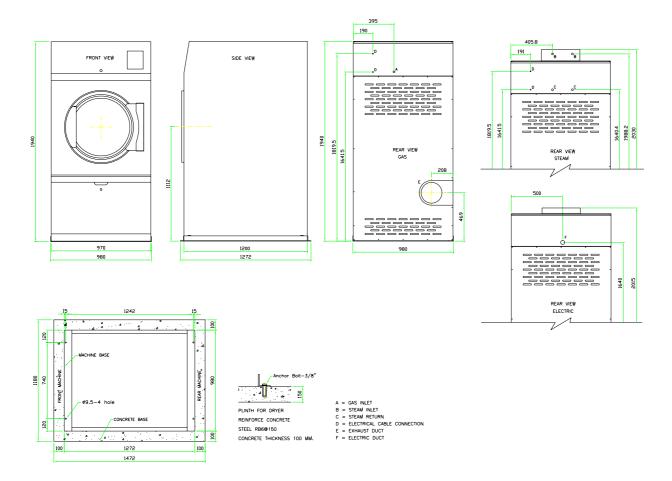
Dryer Model DE75 lb. Technical Dimension
